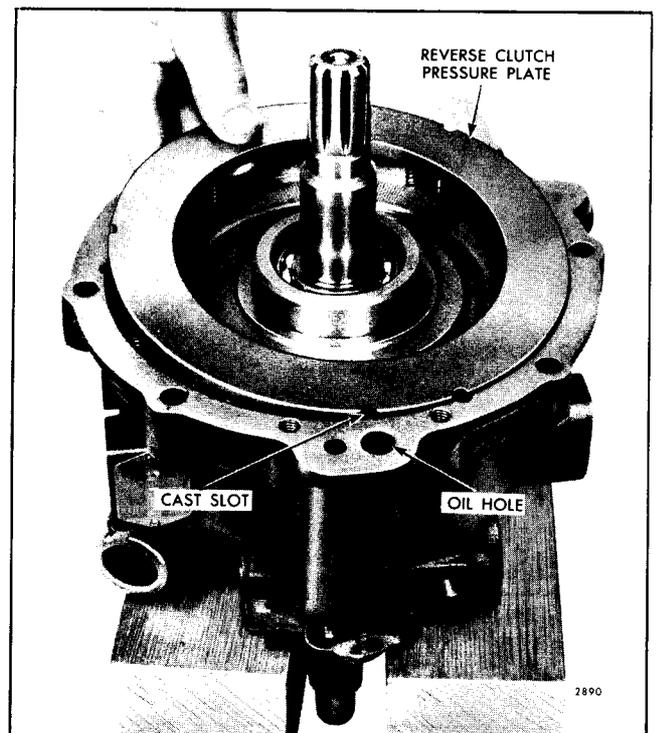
Installing Reverse Clutch Pressure Plate in Gear Housing
